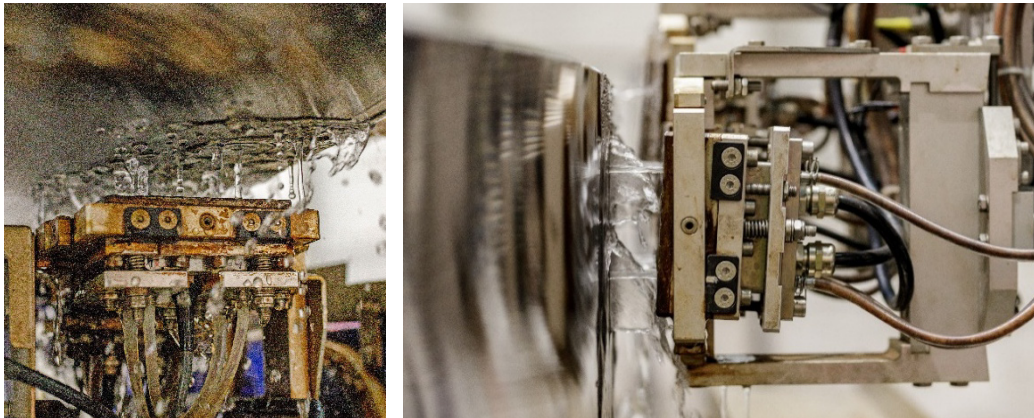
Gimbal-mounted probe holder during the coupling process. Left: bottom, right: front.
